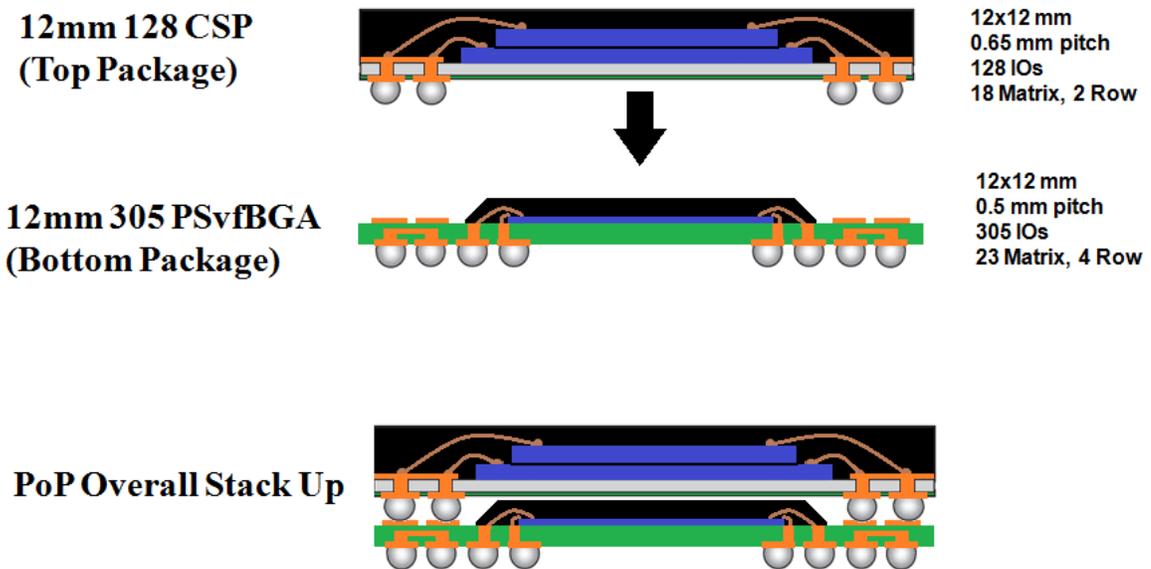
A schematic of Package-On-Package stack showing both the constituent packages viz. the bottom (PSvfBGA) and the top (CSP) packages.
